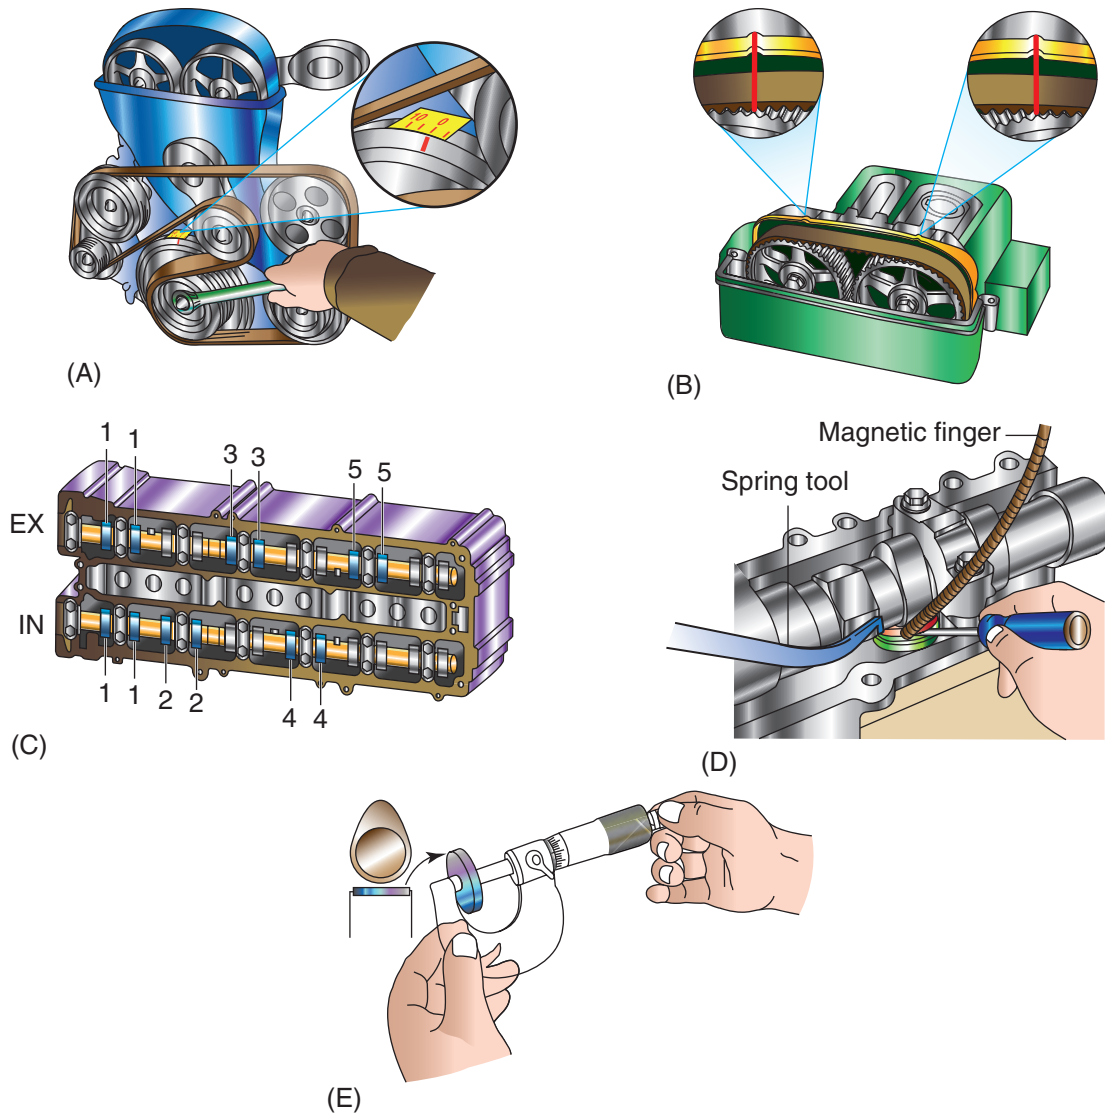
To adjust valve lash: (A) Rotate the crankshaft so that it is at TDC. (B) Check the camshaft alignment marks. (C) Measure and record the valve lash of the valves that are totally closed. (D) Use a small screwdriver and a magnetic finger to remove the adjusting shim. (E) Measure the thickness of the shim with a micrometer to determine the correct shim to install.
